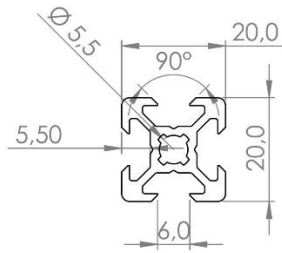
"v-slot 20" aluminium profile cross section with dimensions [109].
